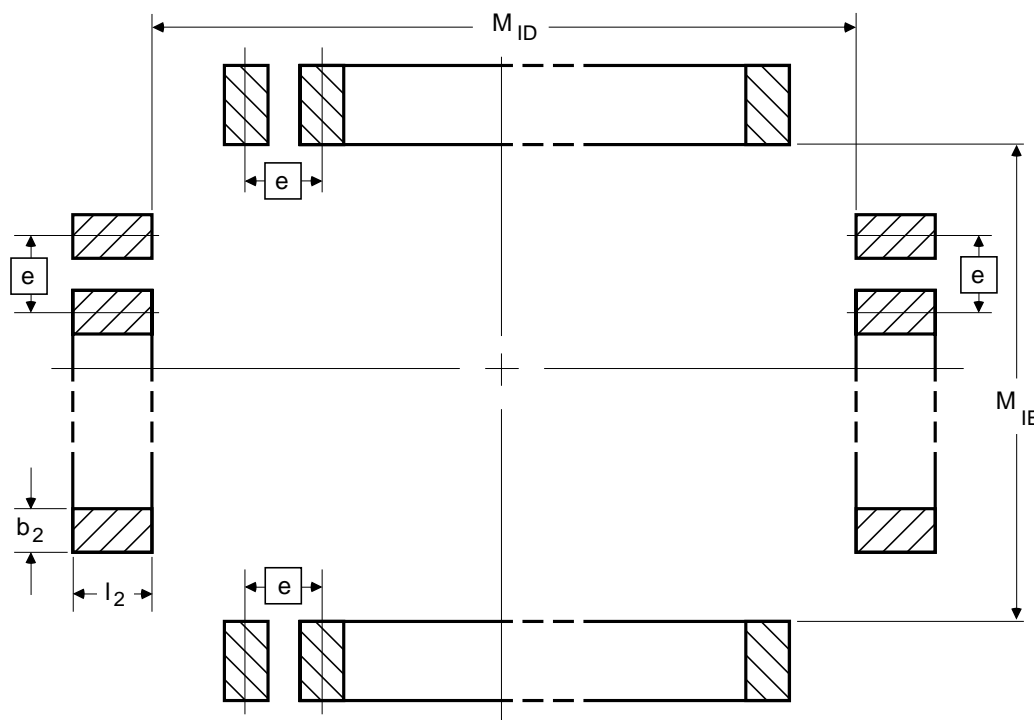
EIA Standard Board Layout of Soldered Pads for QFP Devices
